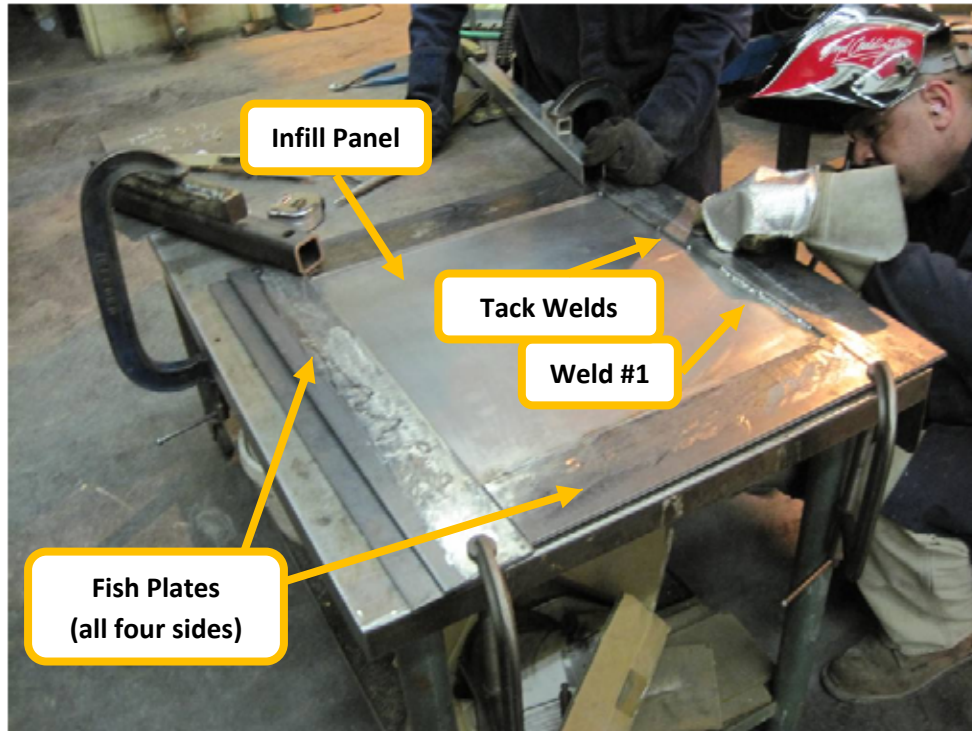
Plan View of a Distortion Specimen during Welding
